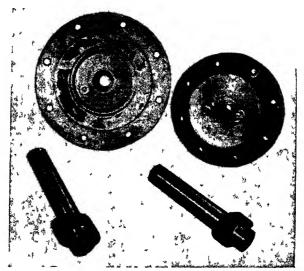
Carbon and bronze bushing in steel or cast-iron sleeve for front head.
